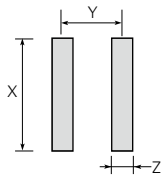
G11 — Dimensions for Gas Discharge Tubes
